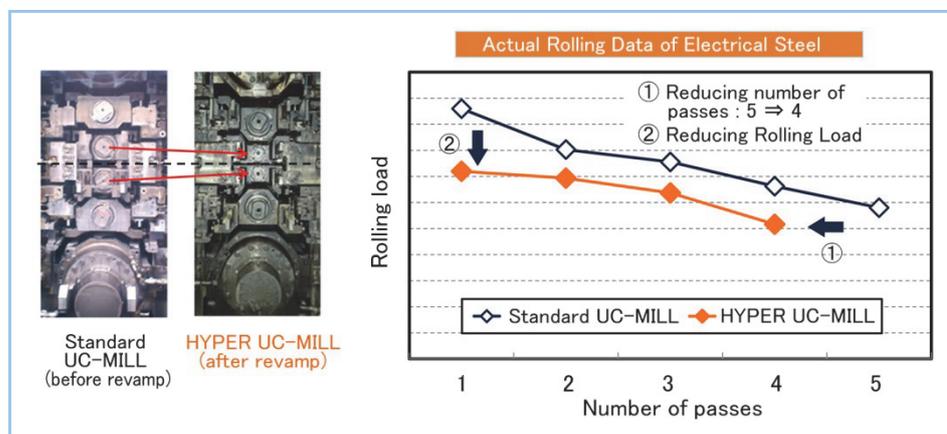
Example of revamp to HYPER UC-MILL on Reversing Cold Mill
